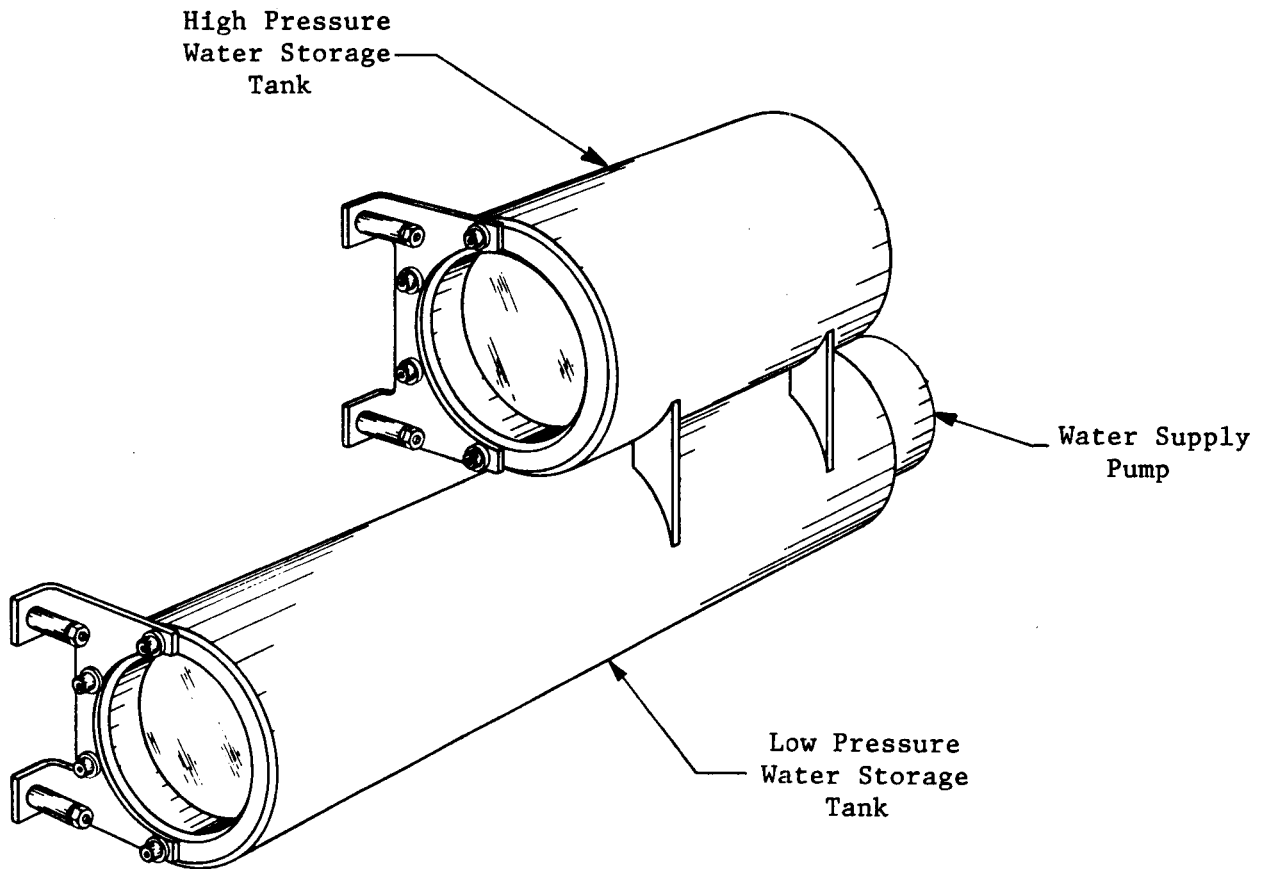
WATER SUPPLY ASSEMBLY FOR RFCS-SSP, ISOMETRIC VIEW
